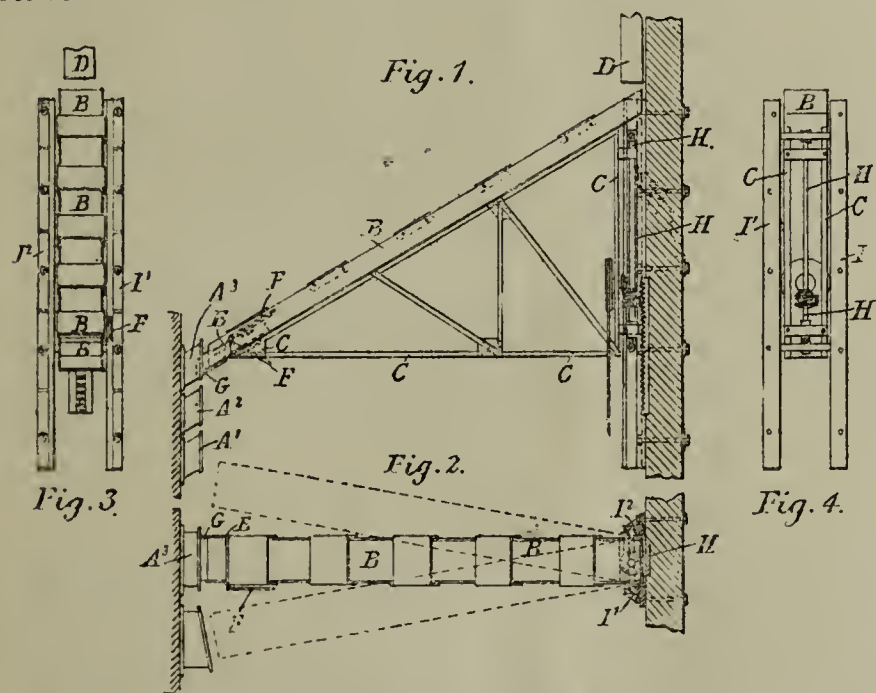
represents in side elevation (partly in section) an arrangement of the apparatus; fig. 2 is a plan; fig. 3 is a front elevation; and fig. 4 is a back elevation.
